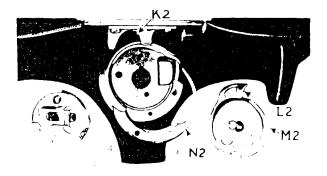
Hook Gib Open for Removal of Bobbin Case Base
